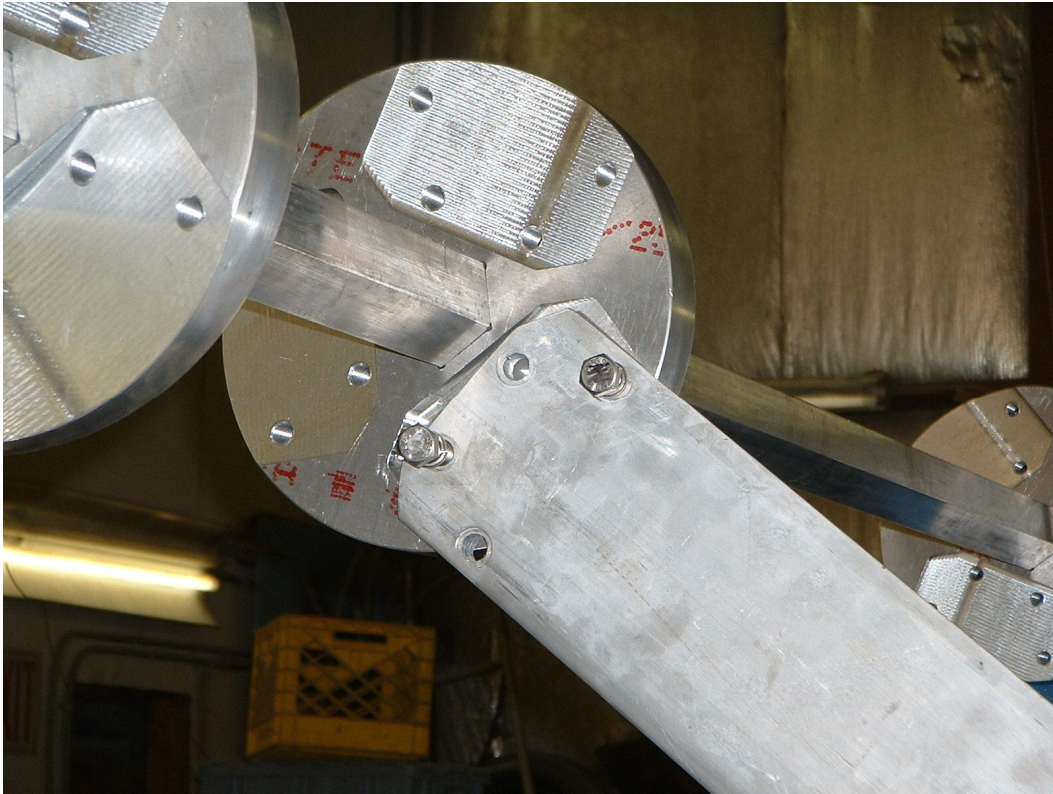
GHT Rotor Blade Assembly Initial Misalignment
